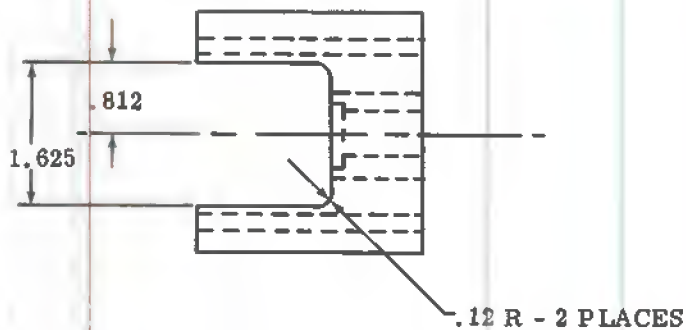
ASSEMBLY, 942300 FLAPPER ALIGNMENT TOOL.
